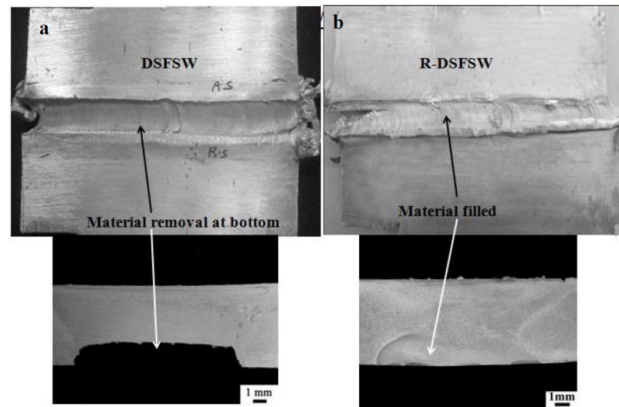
Welded samples (a) DSFSW; (b) R-DSFSW.
